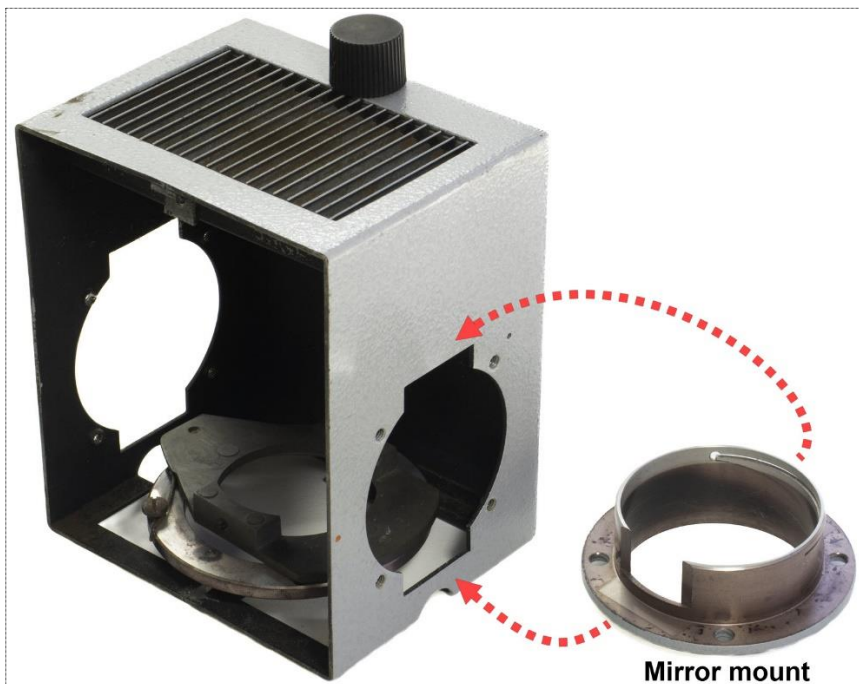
Lamphouse 100 showing how a removed mirror mount should be reattached.
